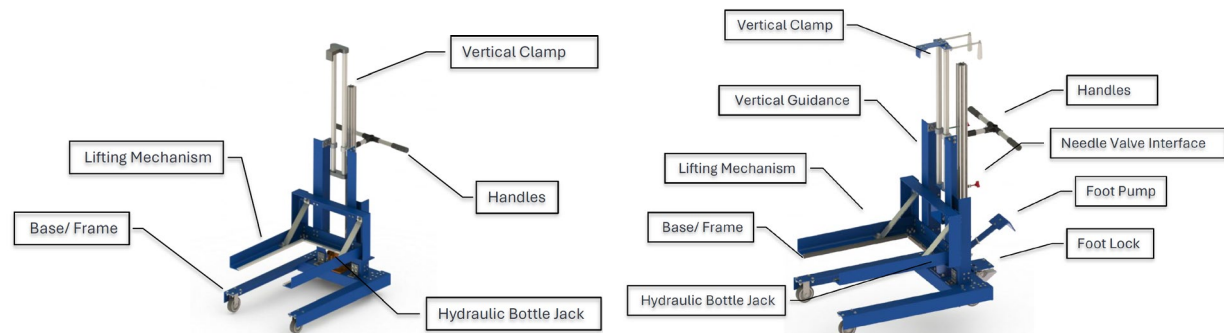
Earlier Concept SolidWorks Model and Handle Assembly. (Left) Revised Concept SolidWorks Model (Right)
